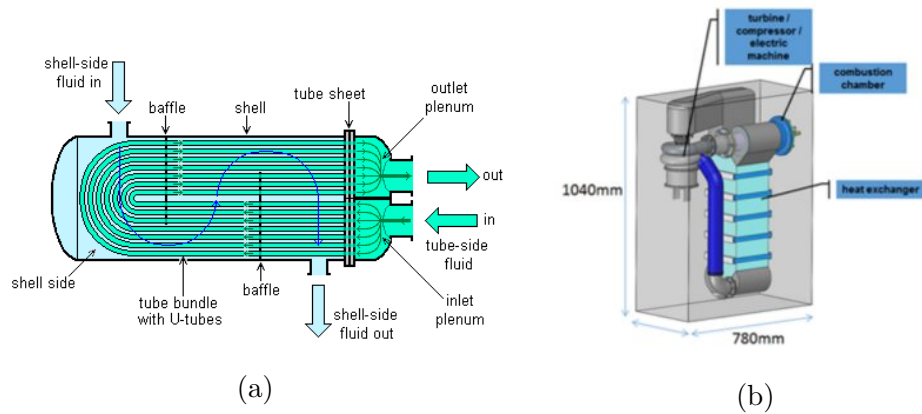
(a) U-tube heat exchanger, (b) Heat exchanger integrated in turbine/compressor.
